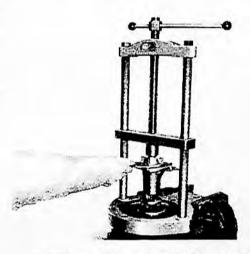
CHECKING IMPELLER CLEARANCE (23C and 87 mm. ENGINES).
